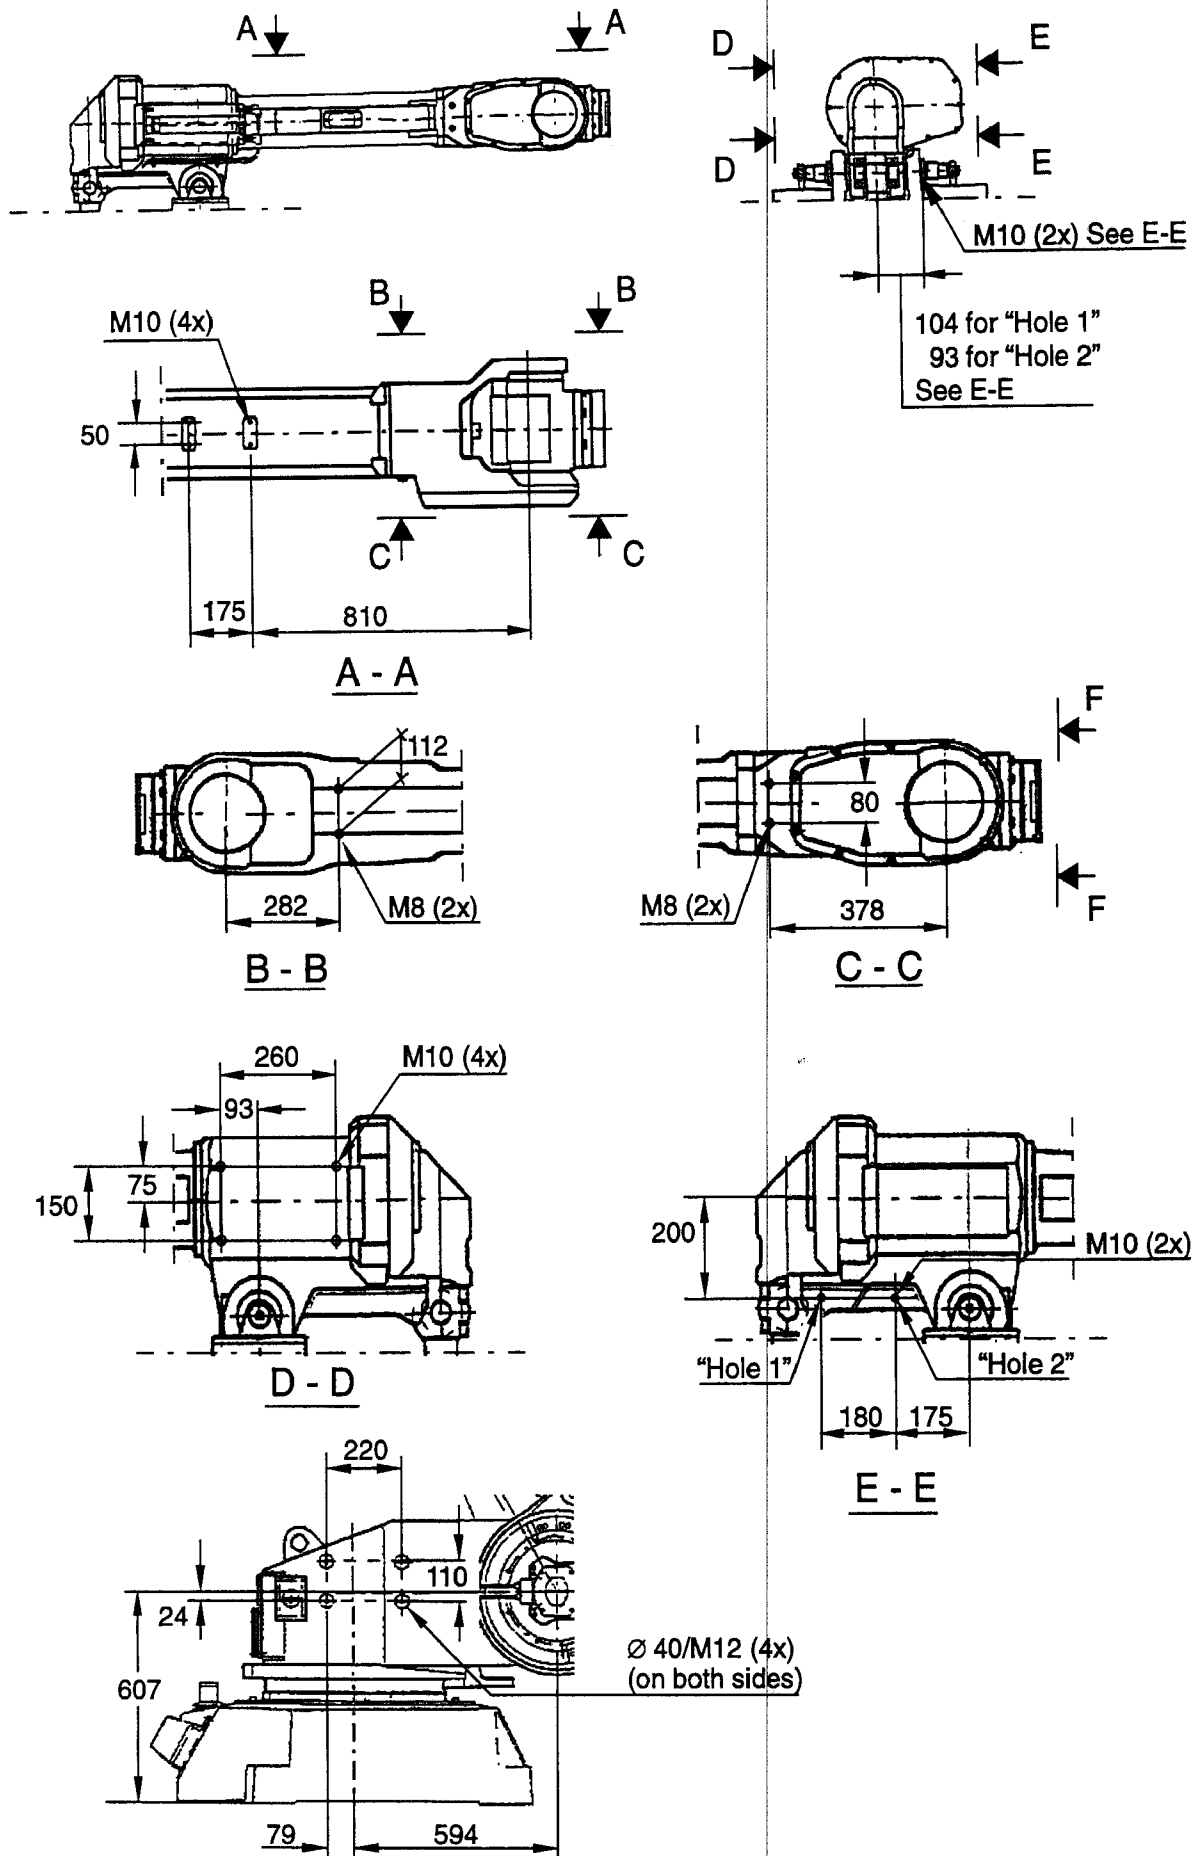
Holes for mounting of extra equipment (dimensions in mm).
